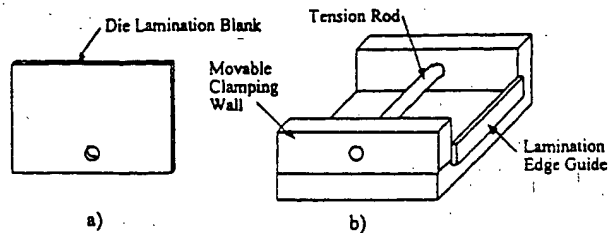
(a) A die lamination blank and (b) PEL clamping frame
